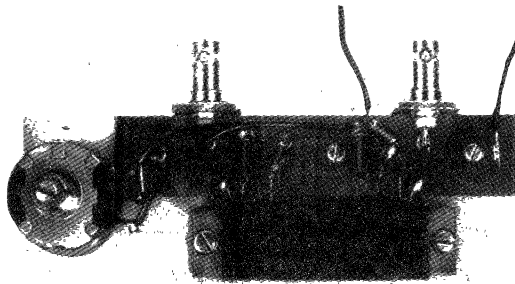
UHF POWER MODULE TEST FIXTURE PRINTED CIRCUIT BOARD
